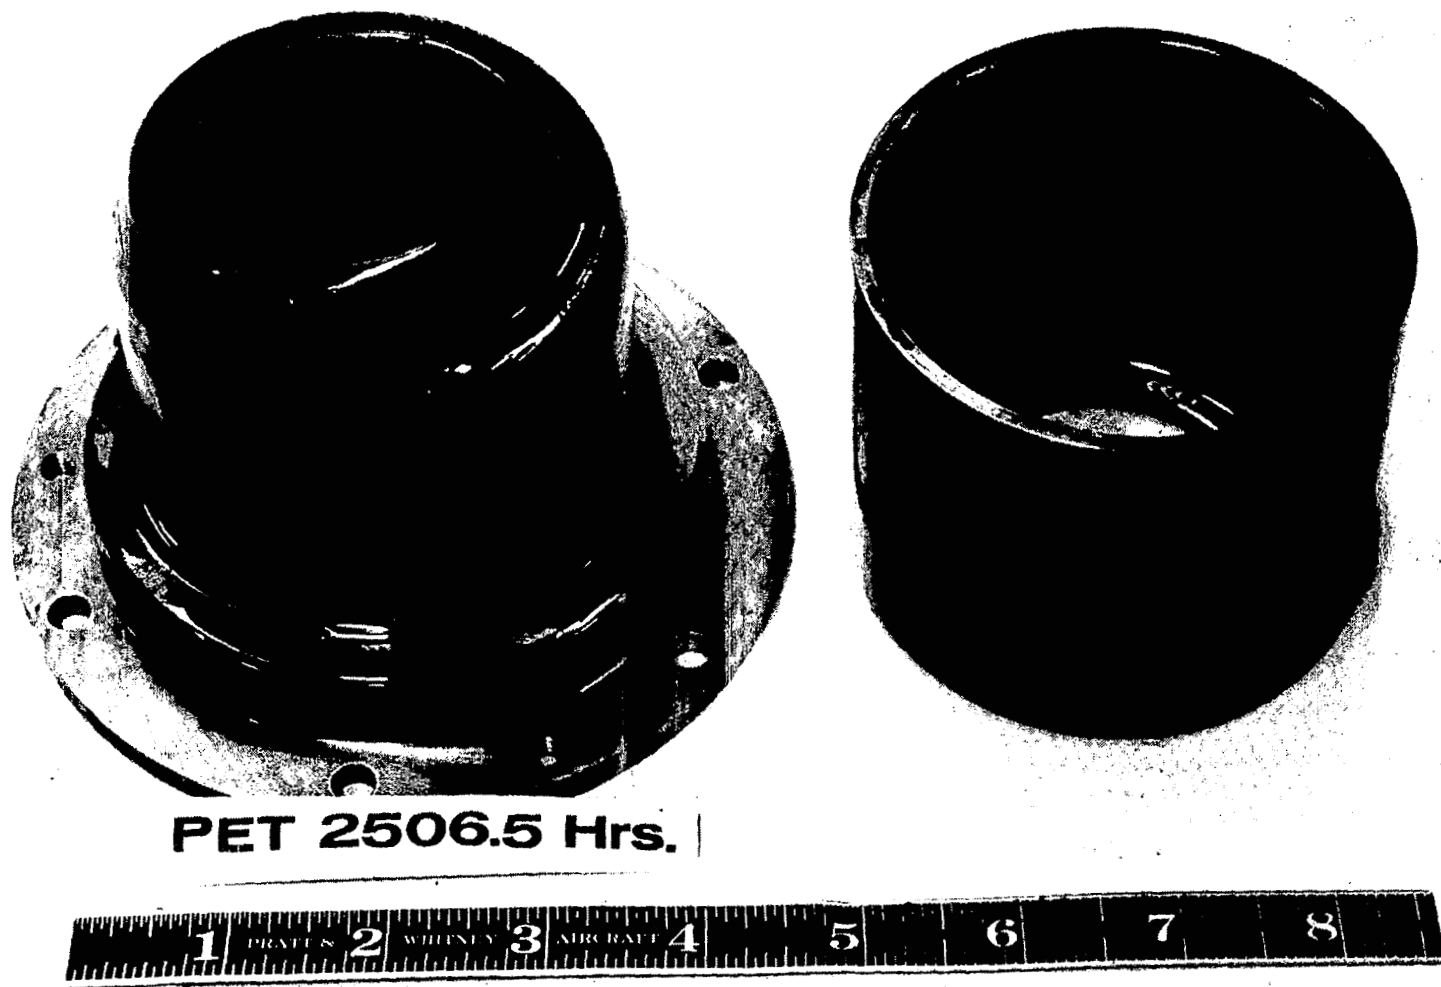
Oil-Gas Outlet Housing of Turbine-Compressor after 2500 Hours of Test CN-10433
